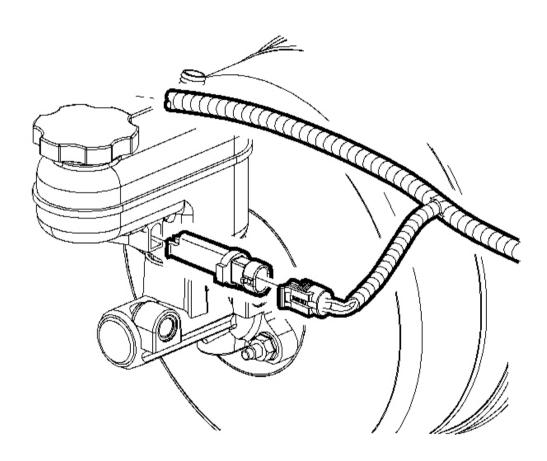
Removing/Installing Brake Fluid Level Sensor Courtesy of GENERAL MOTORS CORP.
